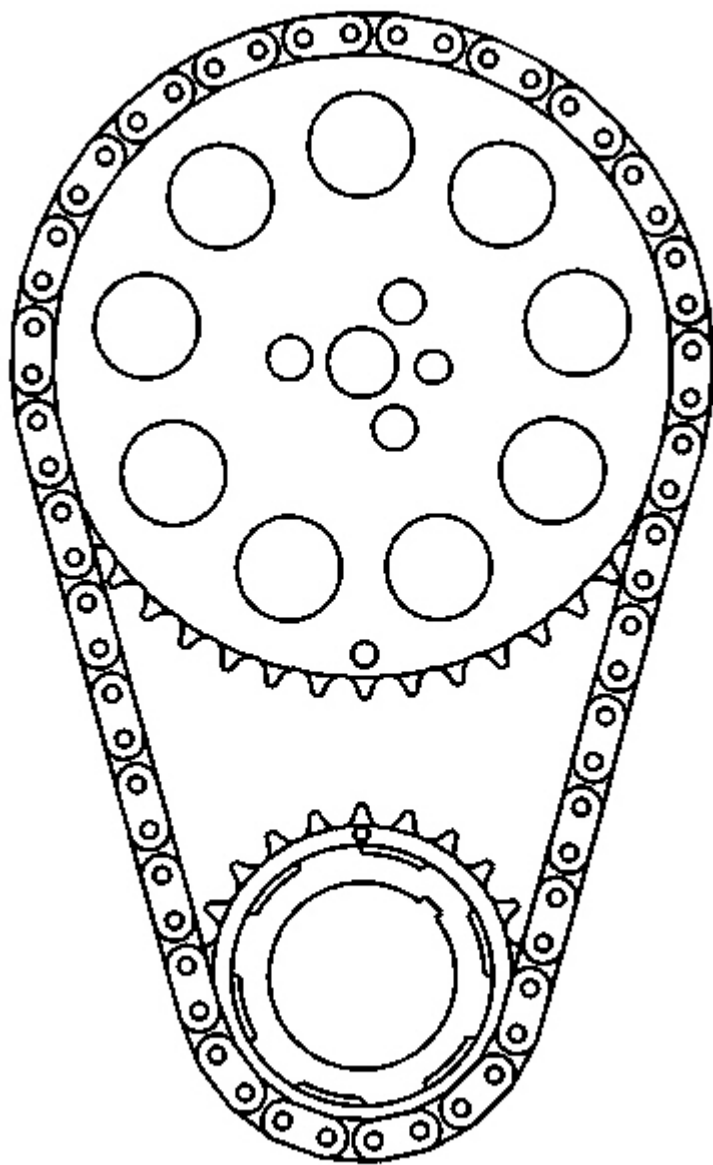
View Of Camshaft & Crankshaft Sprockets Timing Marks Aligned
